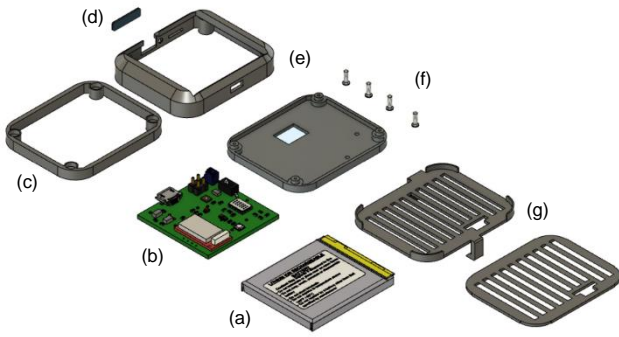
Personalised environmental quality monitoring system (PONG) assembly components: (a) Battery, (b) PONG PCB, (c) 3D printed spacer, (d) USB socket cover, (e) Modified smartwatch housing, (f) Fixing screws, (g) 3D printed sensor cover.
